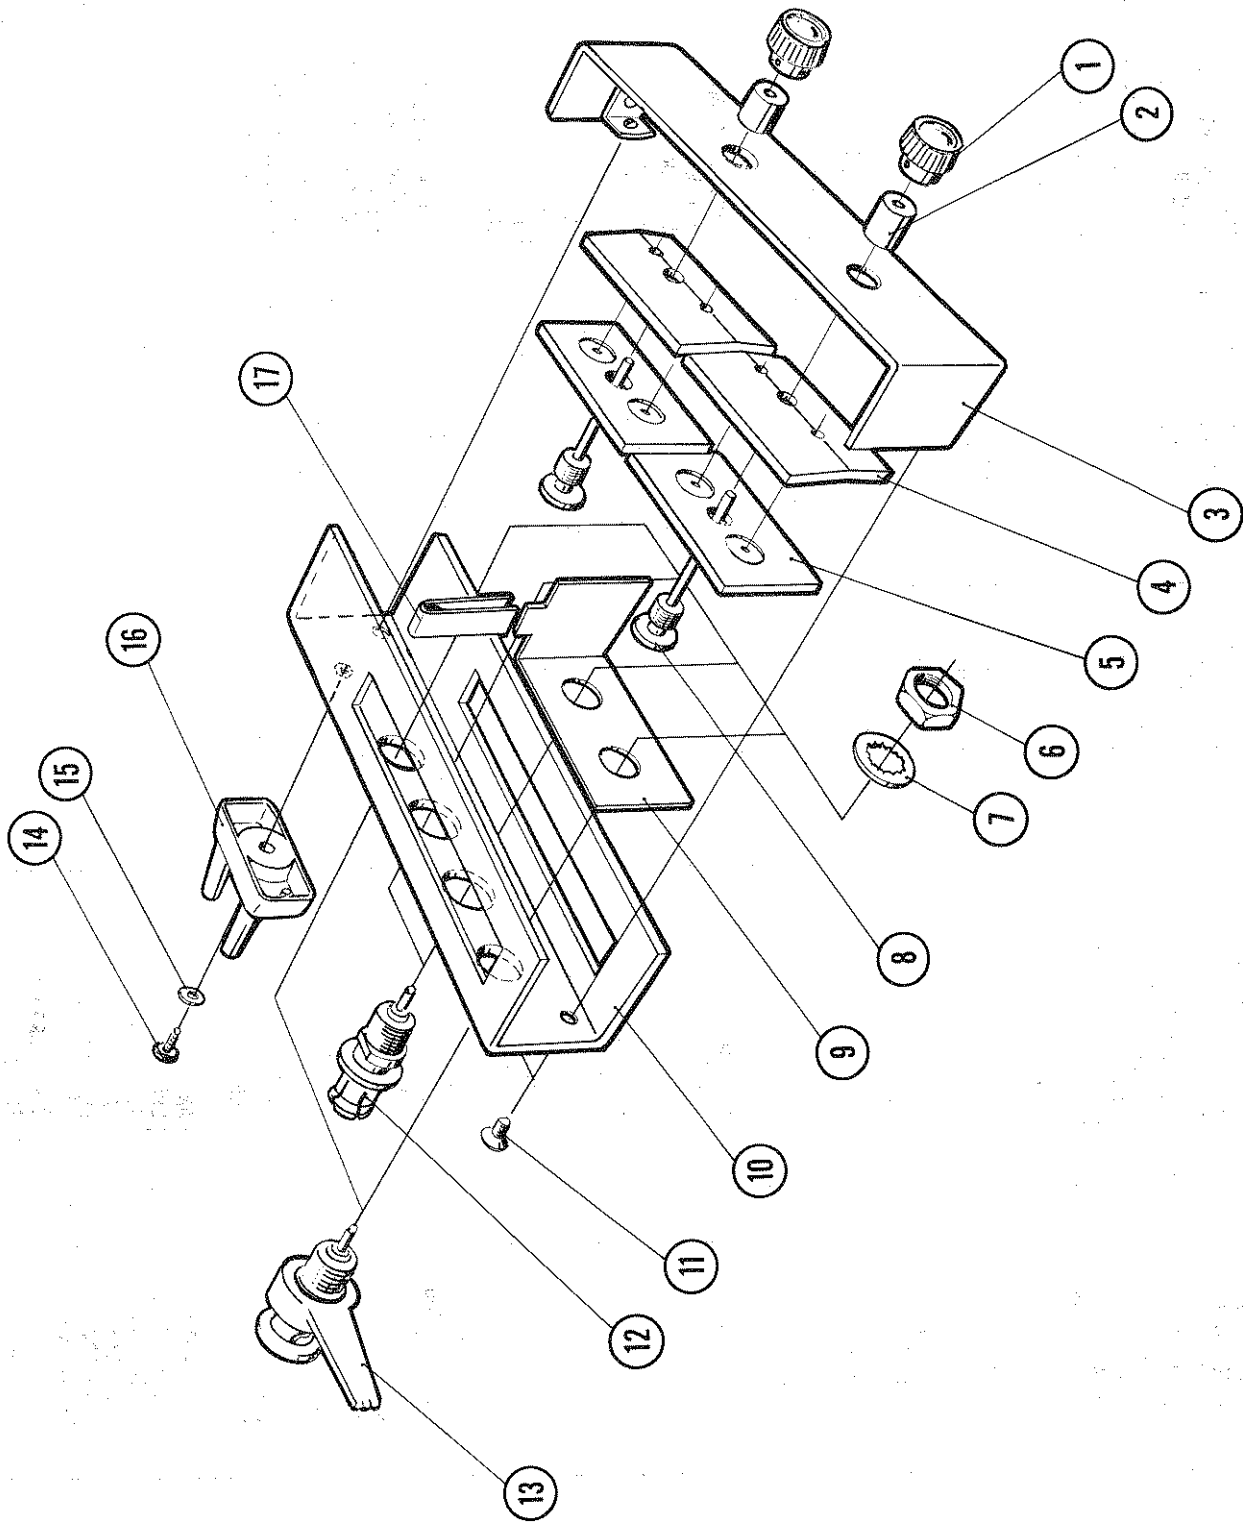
Parts Identification for 16047C (Sheet 1 of 2).
